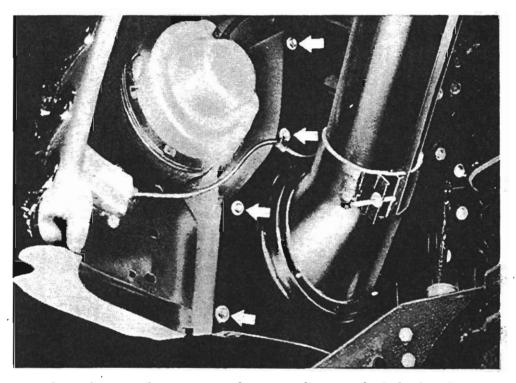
Take Out the Four Fender to Radiator Side Splasher Screws.
